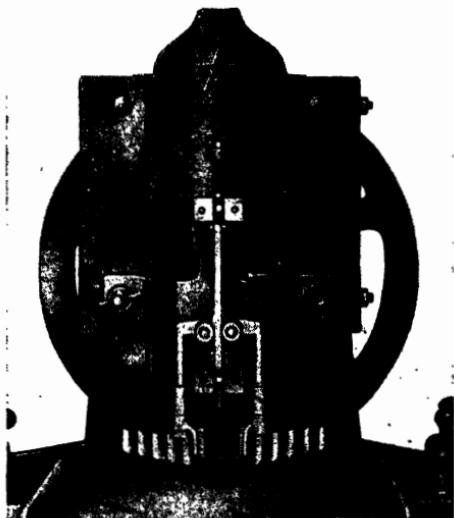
A barrier guard on a corner cutter. (*Courtesy, John T. Robinson Co.*)
